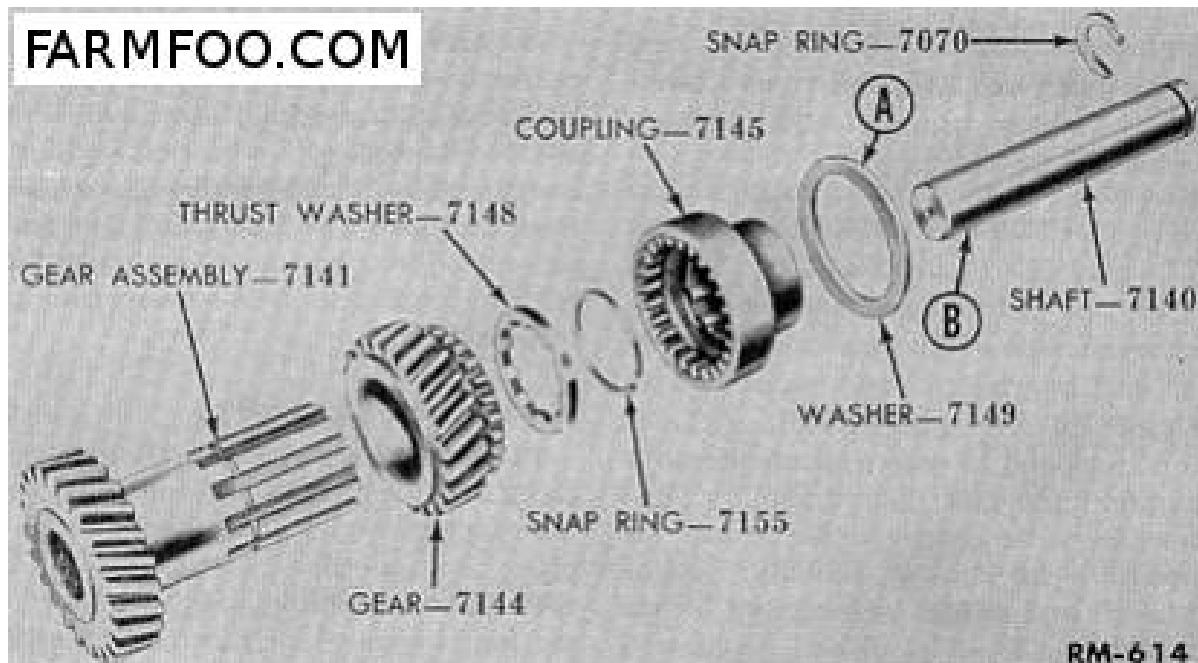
Countershaft, gears and components on model 8N. The PTO shifter unit is connected to the splined end of this shaft.
